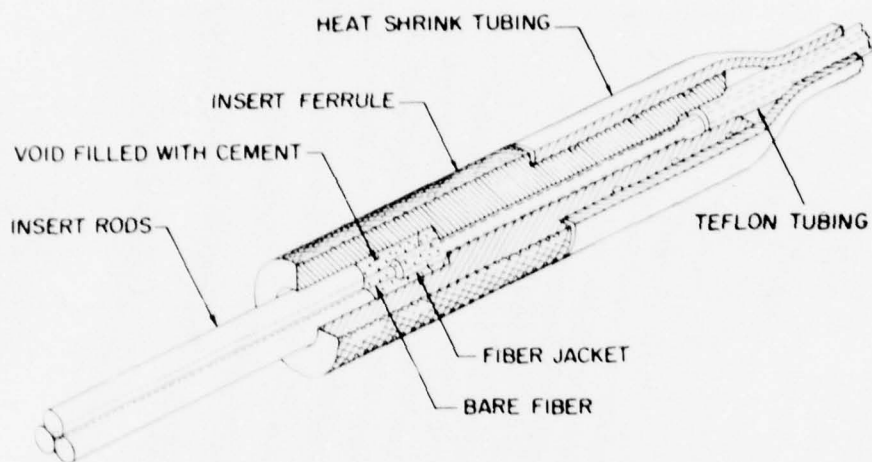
MITRE/ESD 3-Rod Insert Assembly
